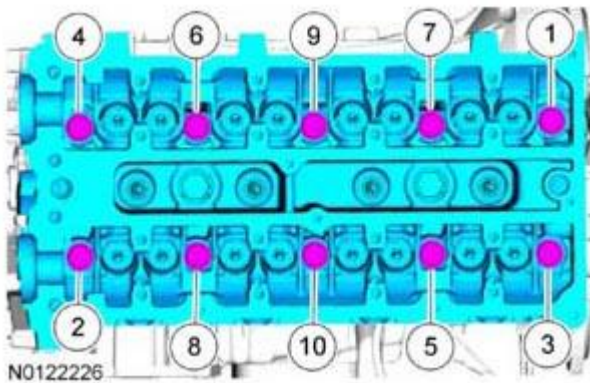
Identifying Cylinder Head Bolts In Sequence
